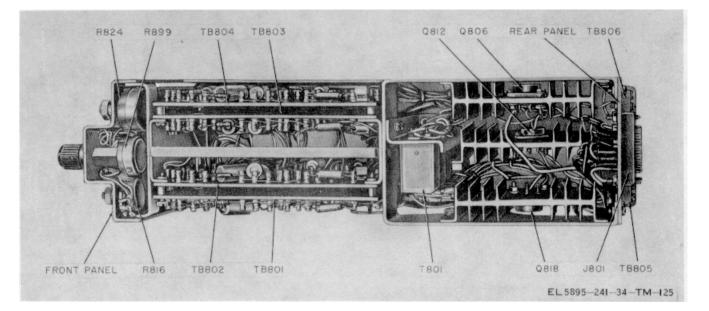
Amplifier Assembly AM-2827/FSW-8, top view, parts location.
